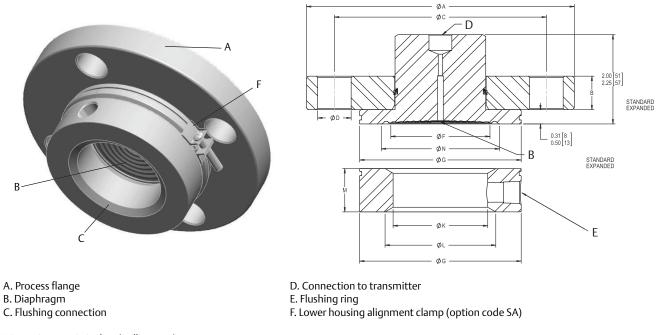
FFW Flush Flanged Seal - Two-Piece Design (Shown with Flushing Ring)
